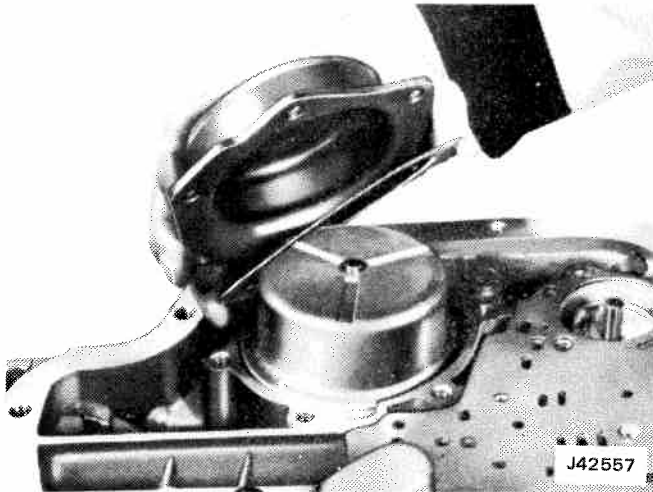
Installing Cover and Gasket Over Rear Servo Assembly
